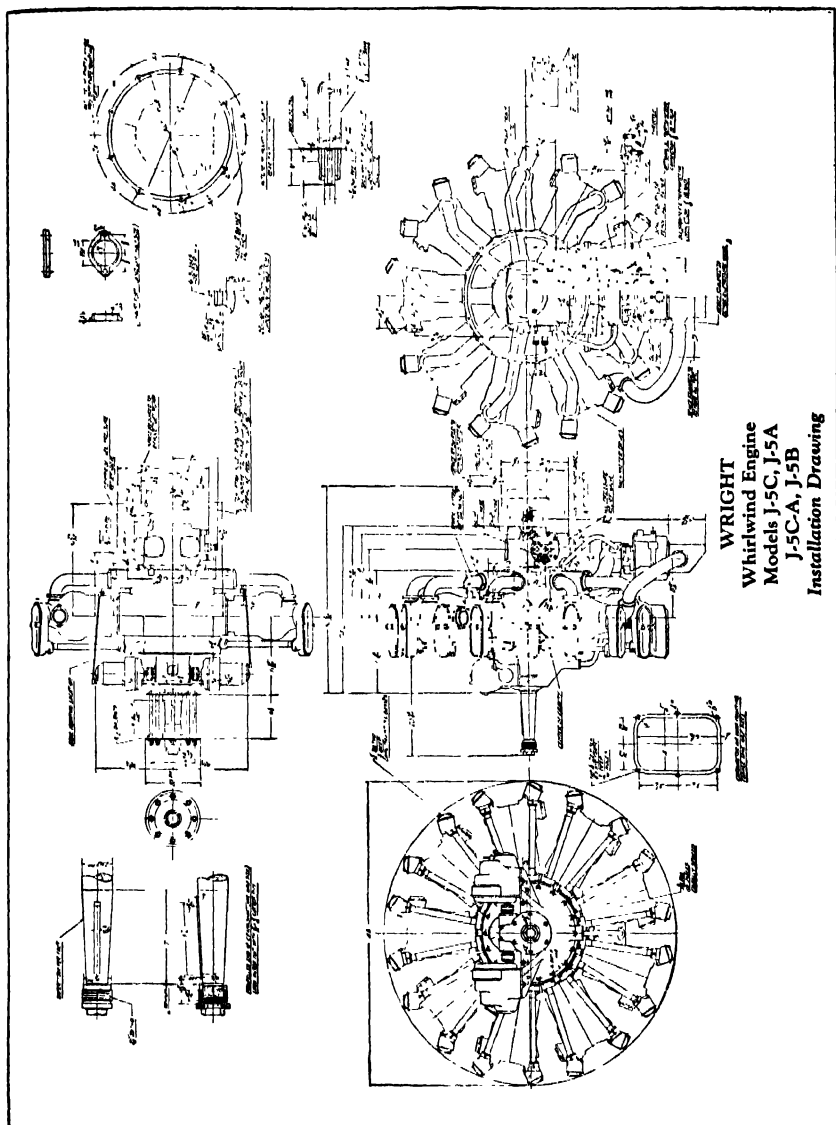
Installation Drawing, Wright "Whirlwind" Engines, Models J5C, J5A, J5CA and J5B.
